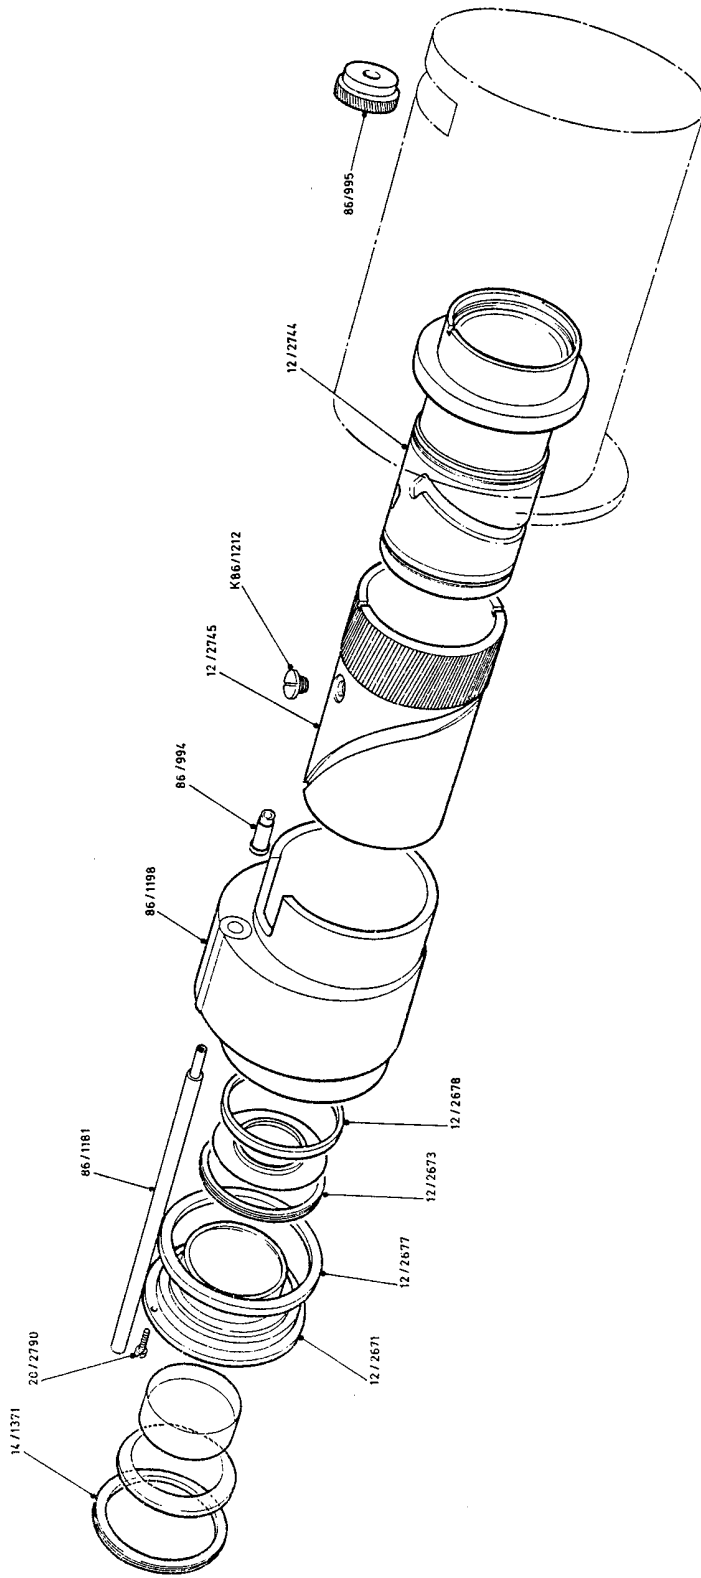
Exploded view of zoom section of lens shown in Fig. 1.
